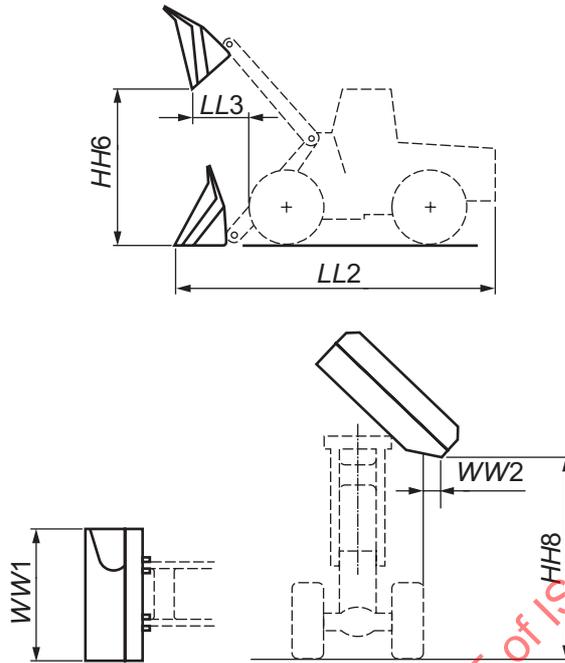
Dimensions of equipment and side dump bucket installed on loaders
